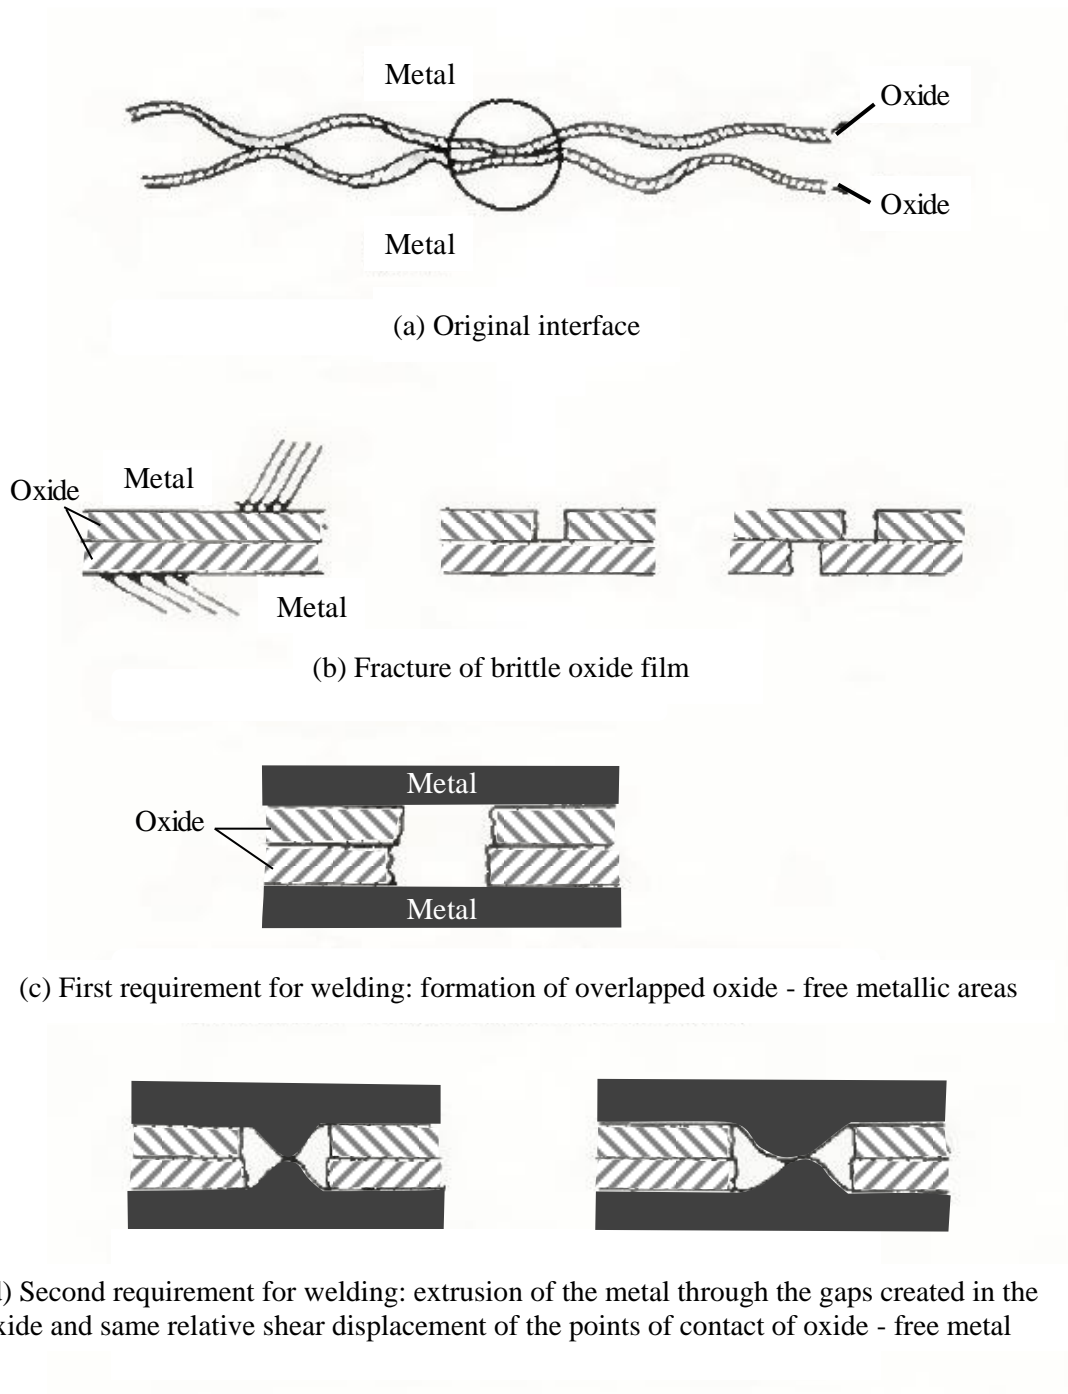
Schematic illustration of pressure welding process²⁰⁾.
